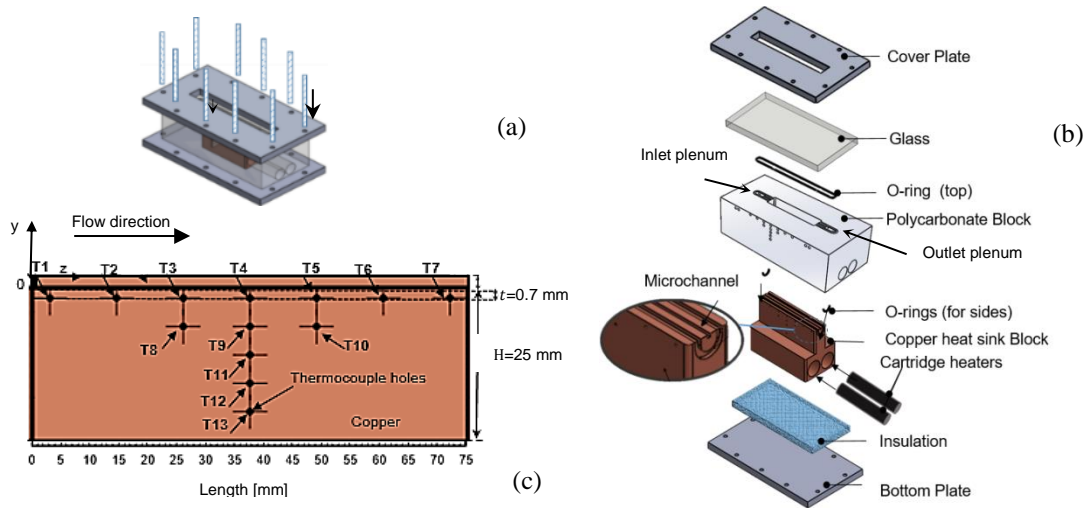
Final test assembly (a), test section parts (b) and side view of the copper block (c).
